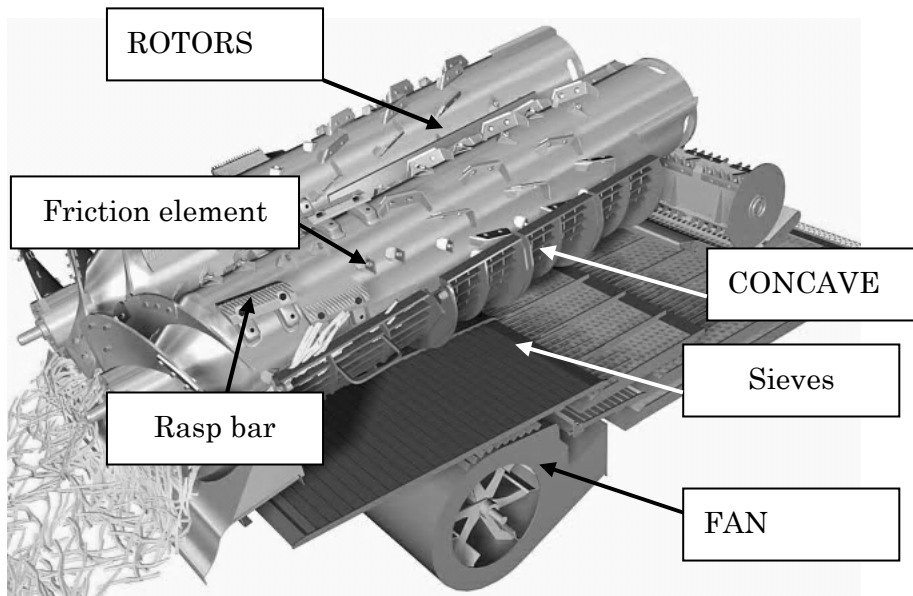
Threshing unit: mechanical parts involved in the threshing process.
